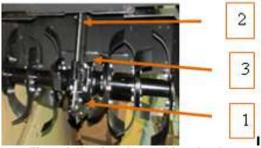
Adjusting the working depth 1 – mill coverage, 2- bolt; 3- performed rod
